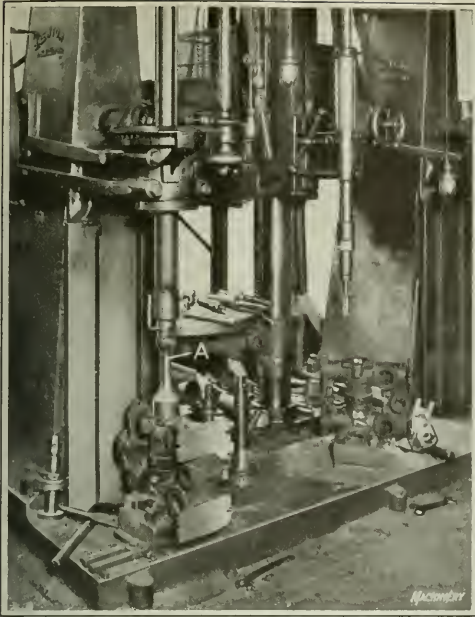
Drilling Machine on which the Cylinder is bored and the Cylinder Head Bolting Surface machined
